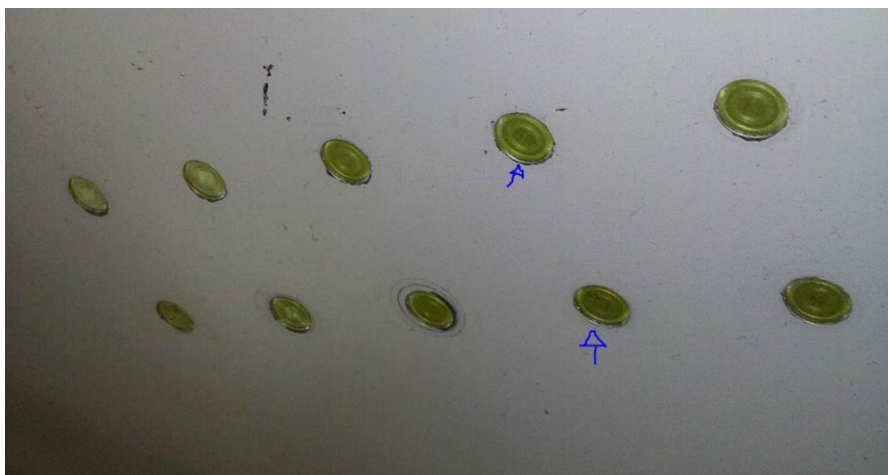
Rivet too deep into the panel - countersink hole too deep
